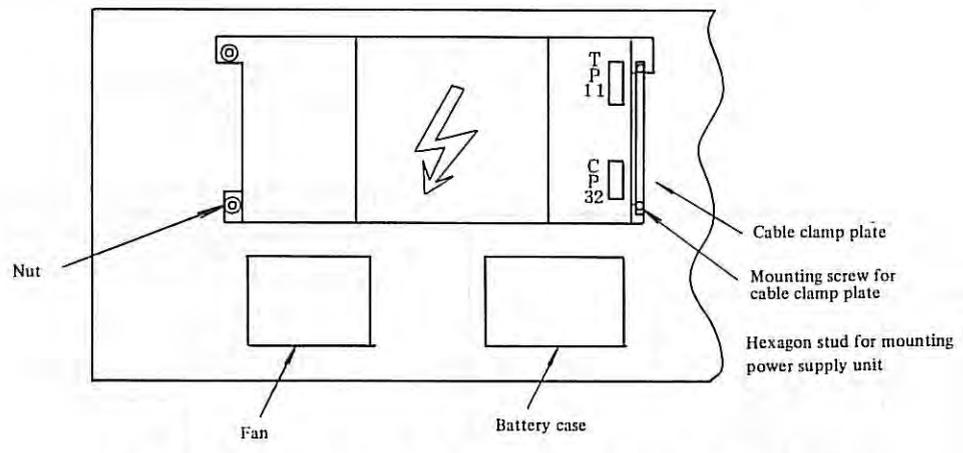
(a) Rear Door of Power Supply Unit Cabinet
